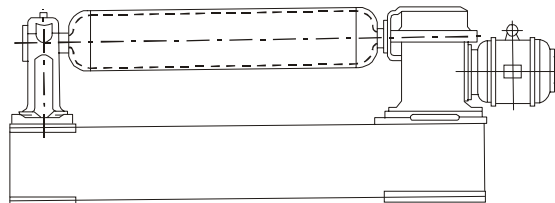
Individual drive from flanged motor coupled to gear box
